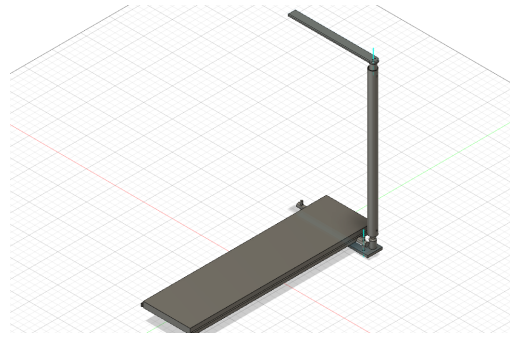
Support arm with attaching mechanism from Fusion360 design.
